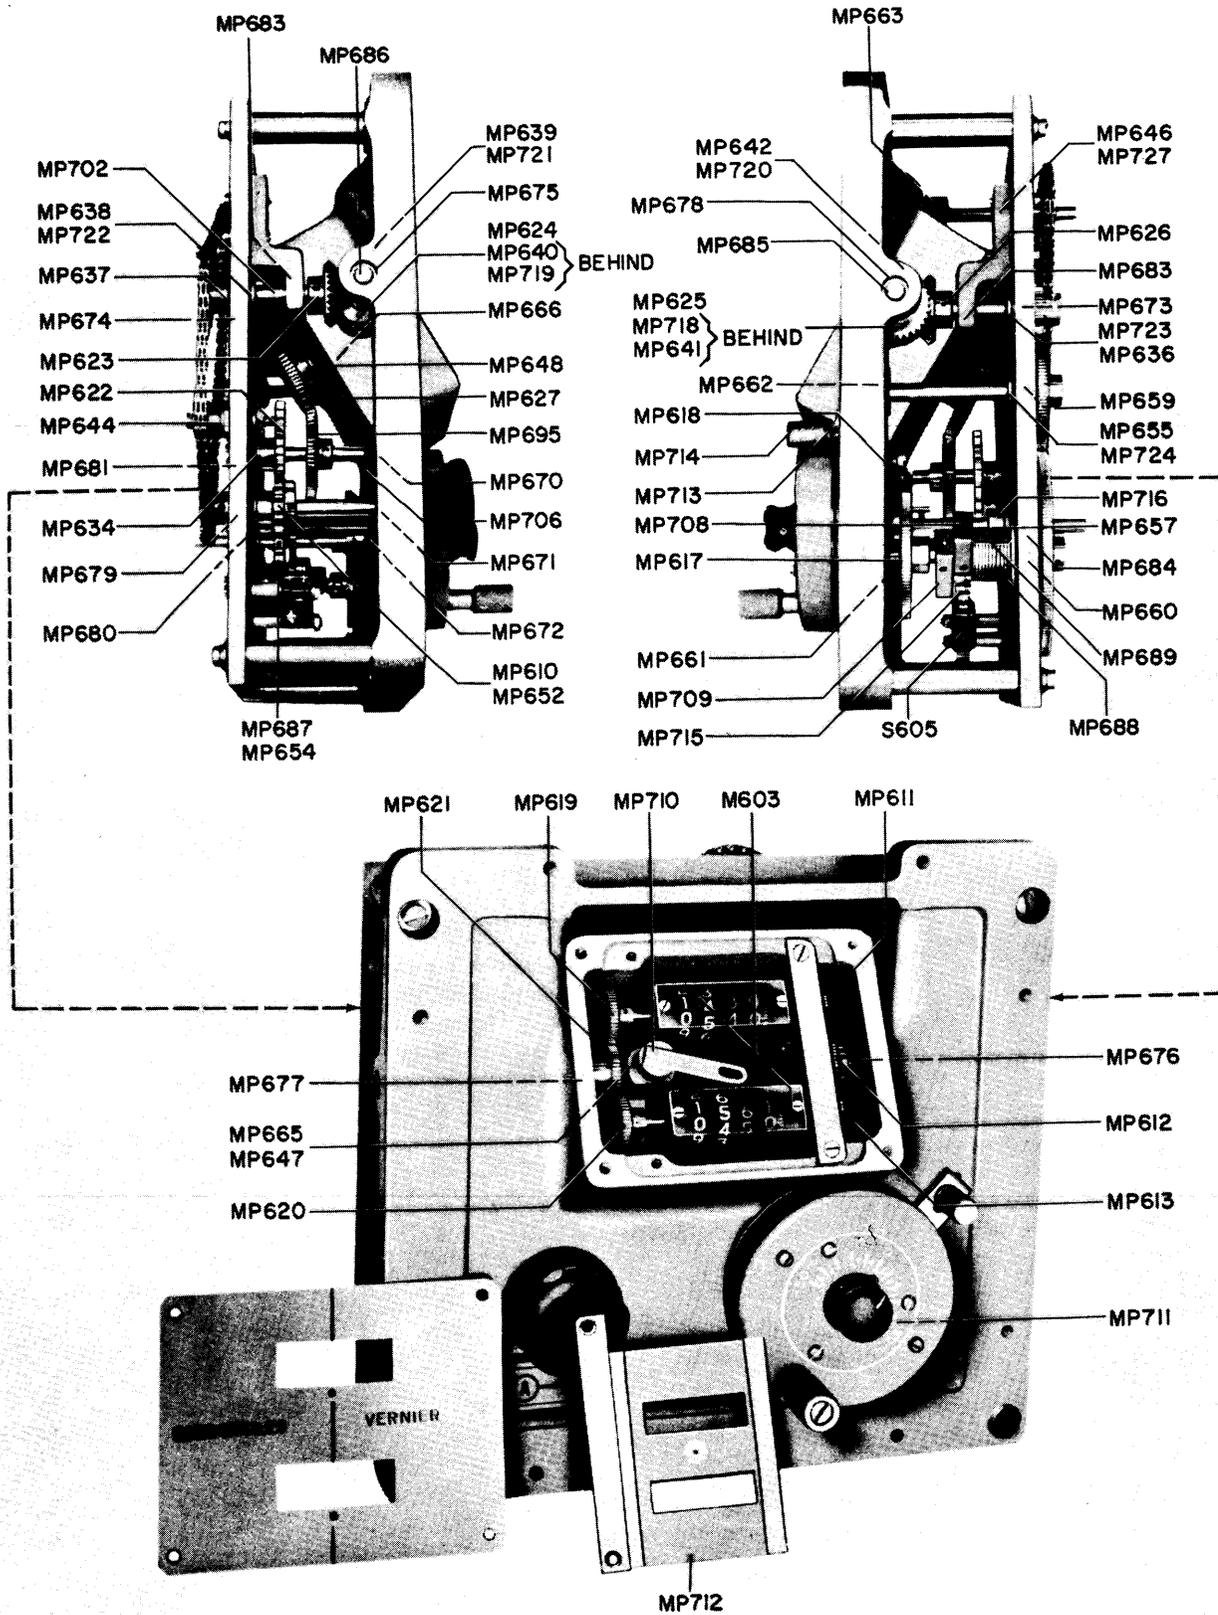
Electrical Frequency Control C-2764/WRT-2, Location of Parts on Back Plate of Gear Box
